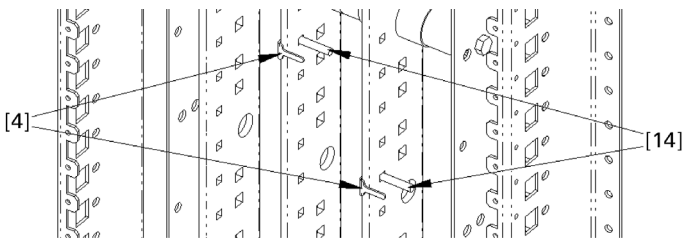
Installing carriage bolt assemblies on phases B and C, isometric view.
